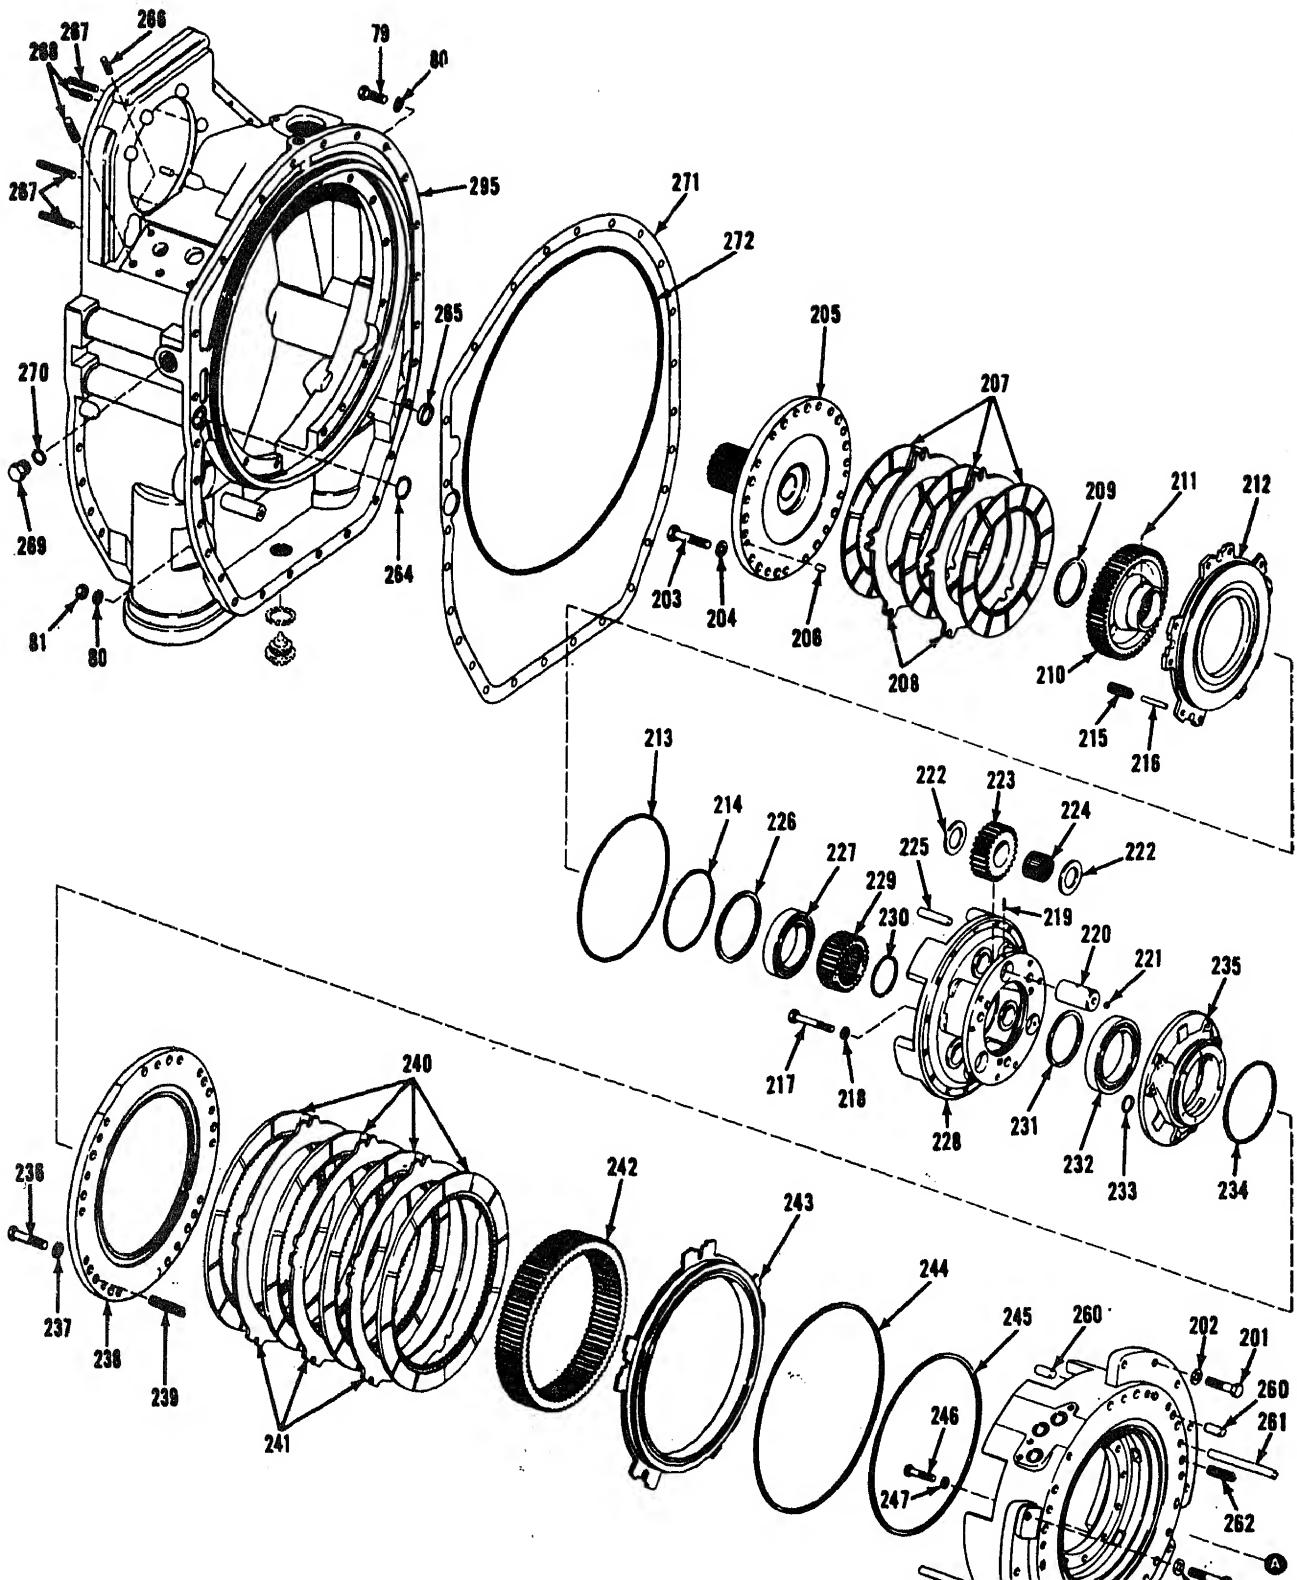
Transmission, exploded view (Sheet 3 of 4).
